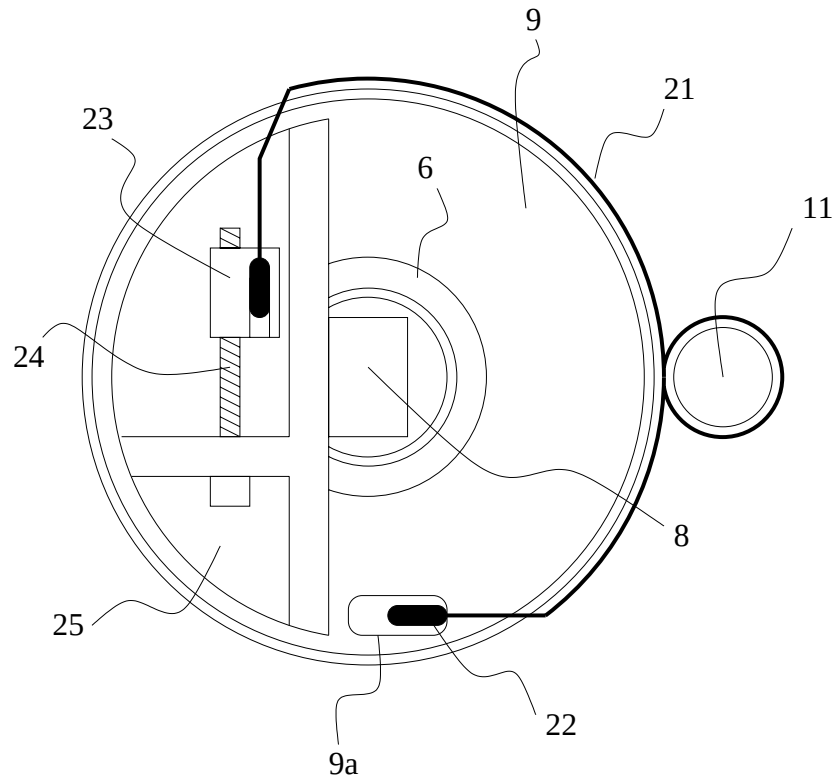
Cable tensioning mechanism. The same tensioning mechanism was used for all the cables in the arm. One end of the cable (21) is terminated in a slot in the large pulley (9a). It wraps around the large pulley (9), around the motor pulley (11), and terminates in the tensioning block (23). The block can be moved by the tensioning screw (24), so adjusting the cable tension. The screw is part of a metal piece (25), which doubles as a connection between the end of the spring (8), and the large pulley.
